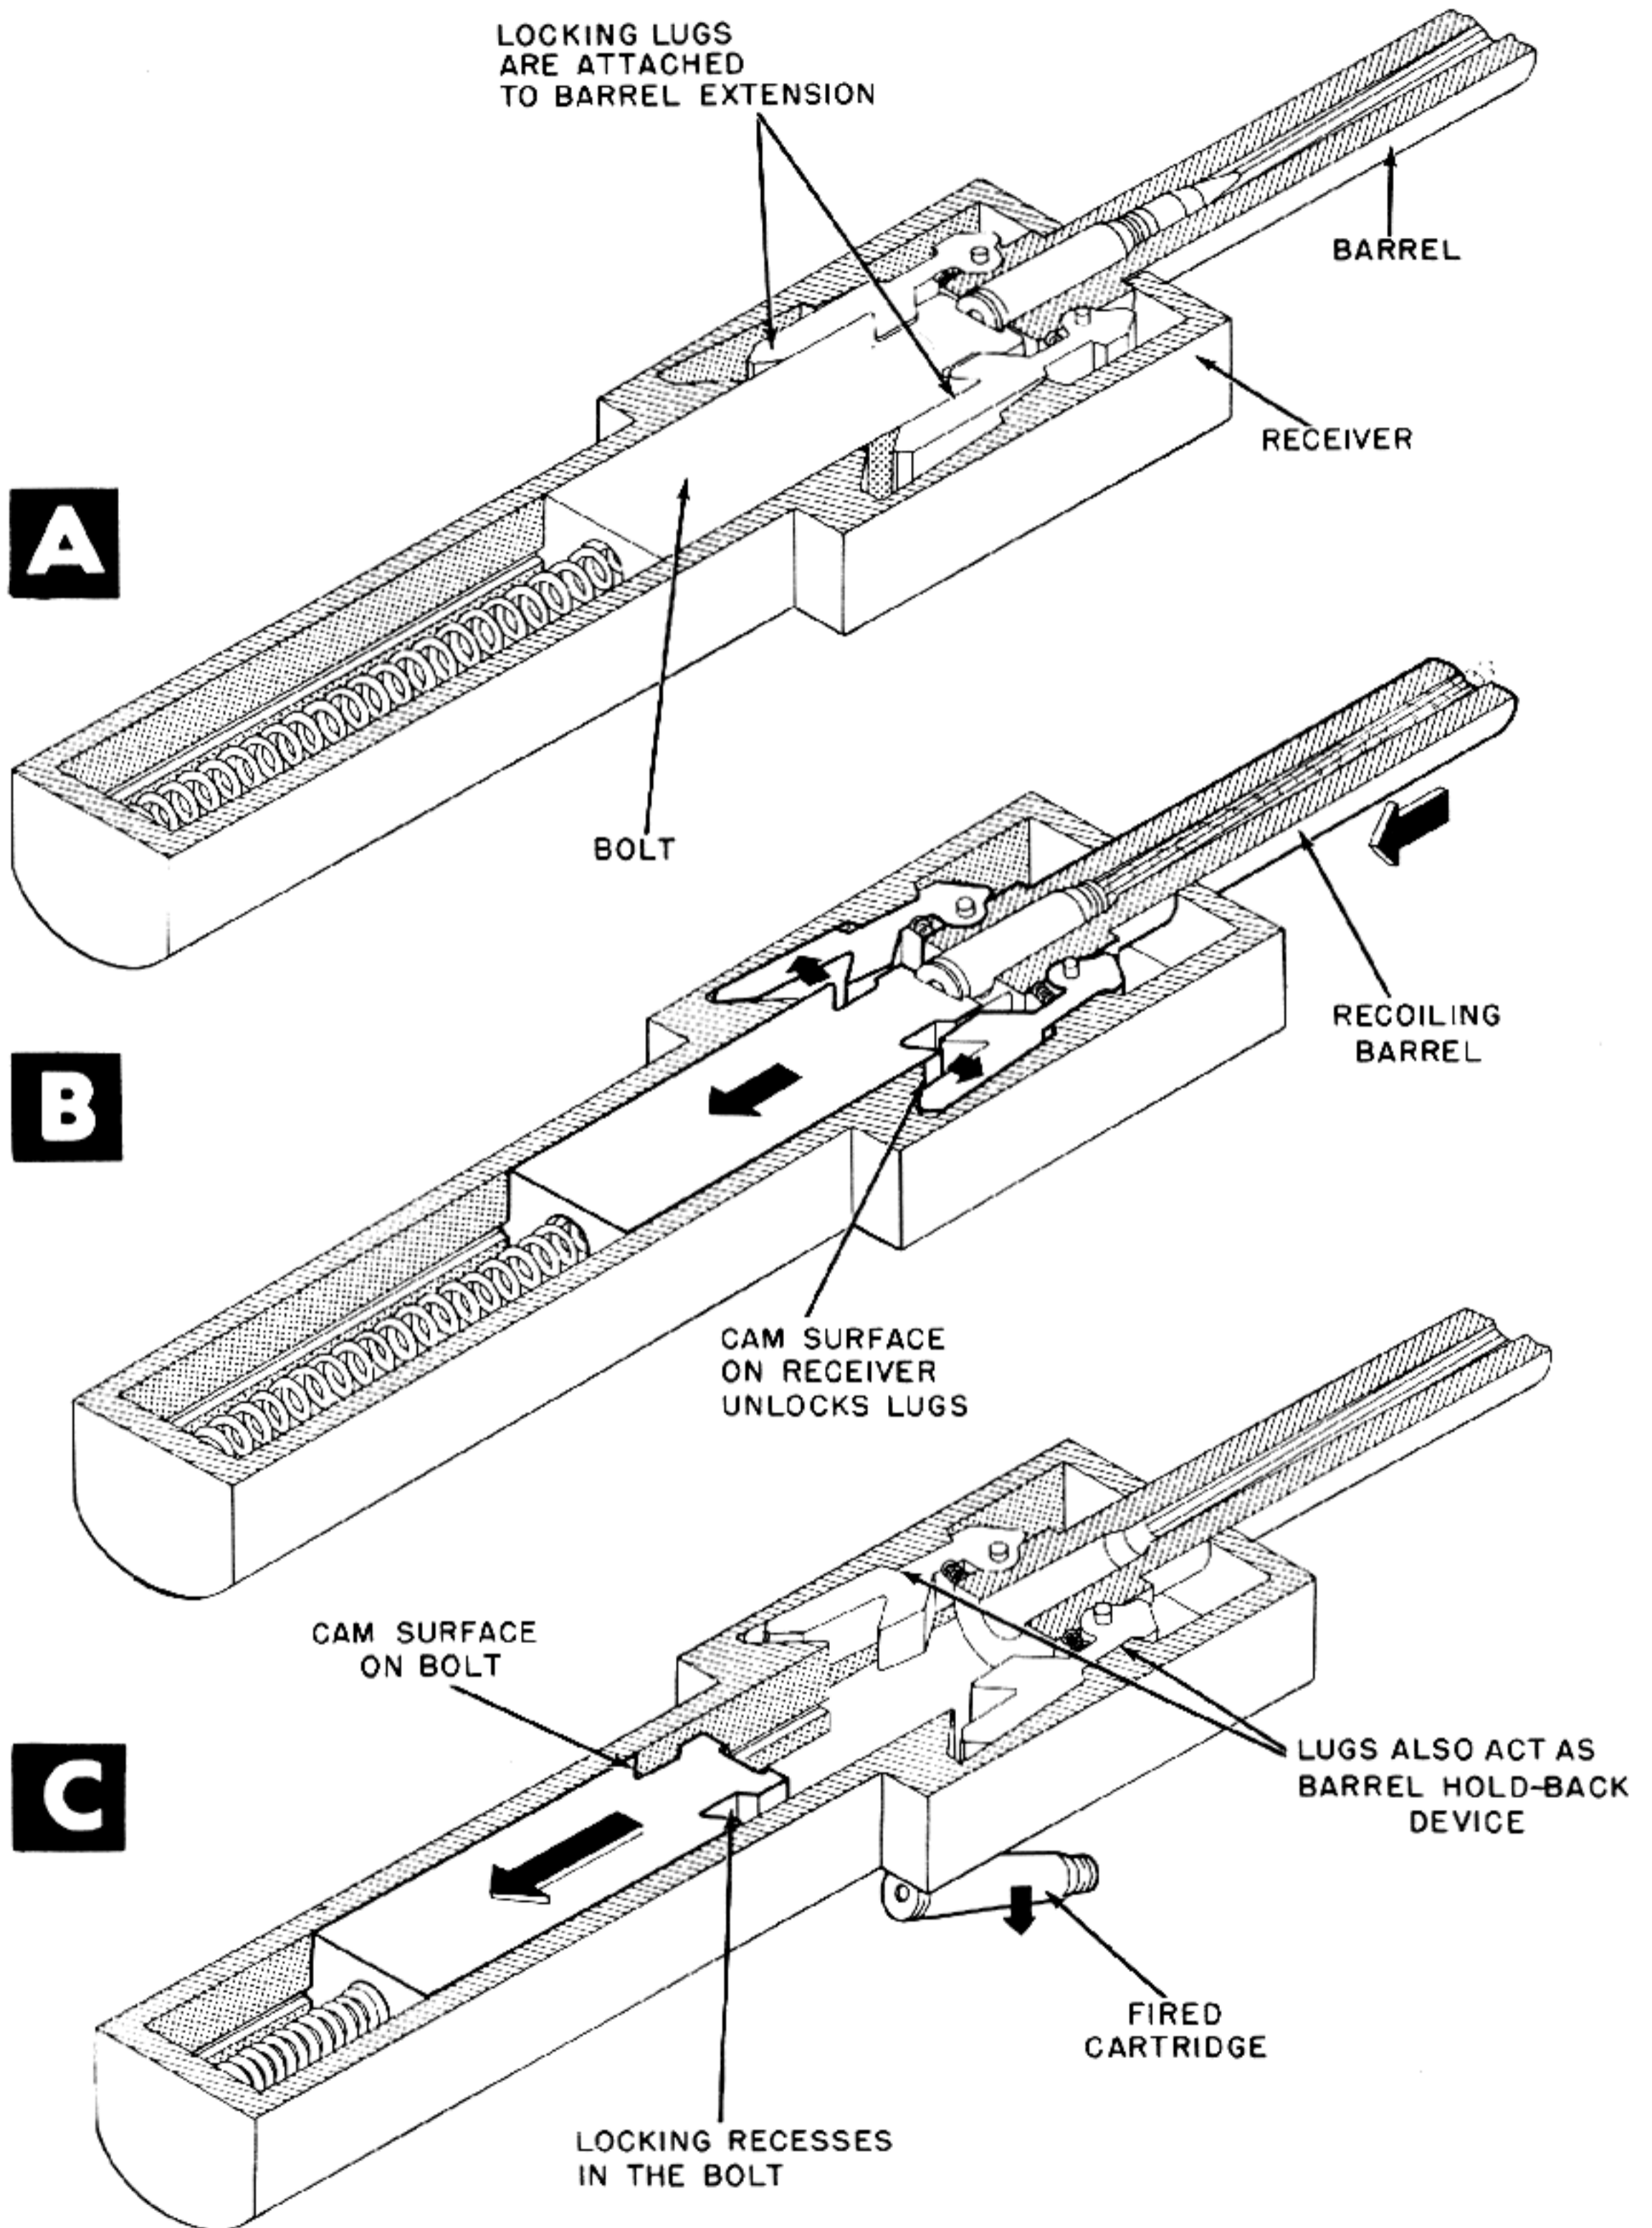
Recoiling Barrel Extension Cams Locking Lugs Free of Bolt.
